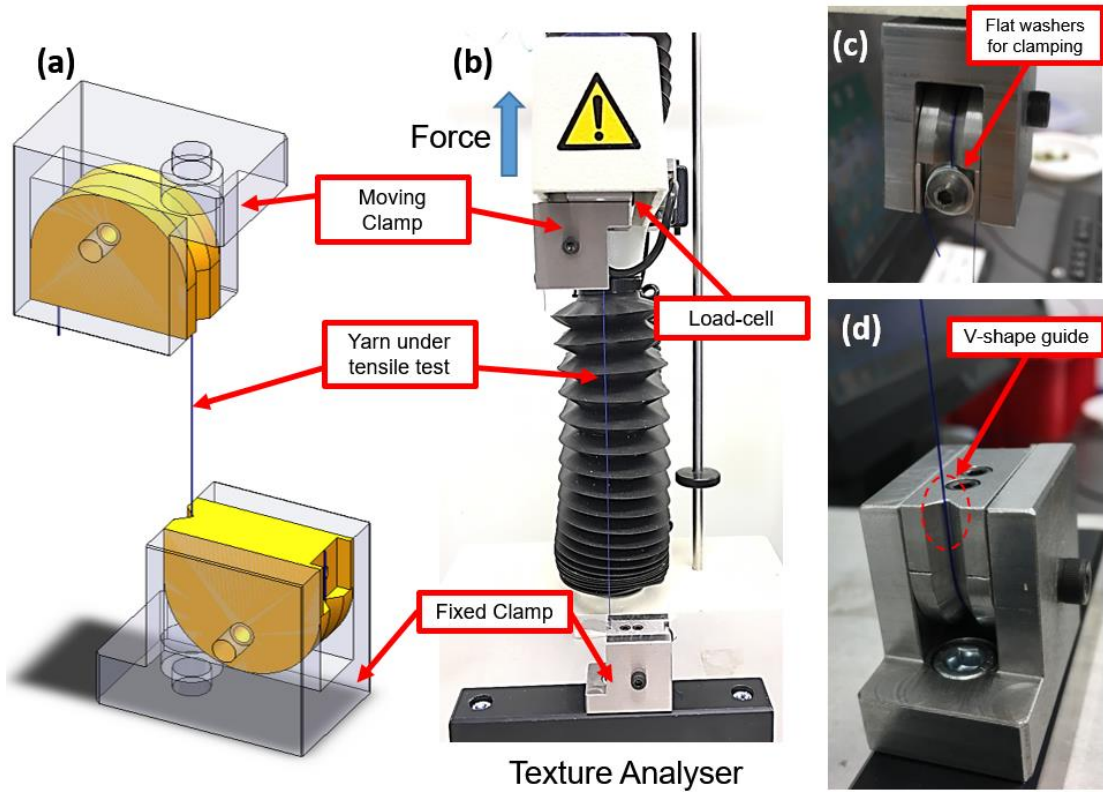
(a) Schematic view of clamping jigs made for the tensile tests, (b) test setup, yarns were clamped by passing between two washers tighten by a screw in (c) upper clamp, (d) lower clamp
